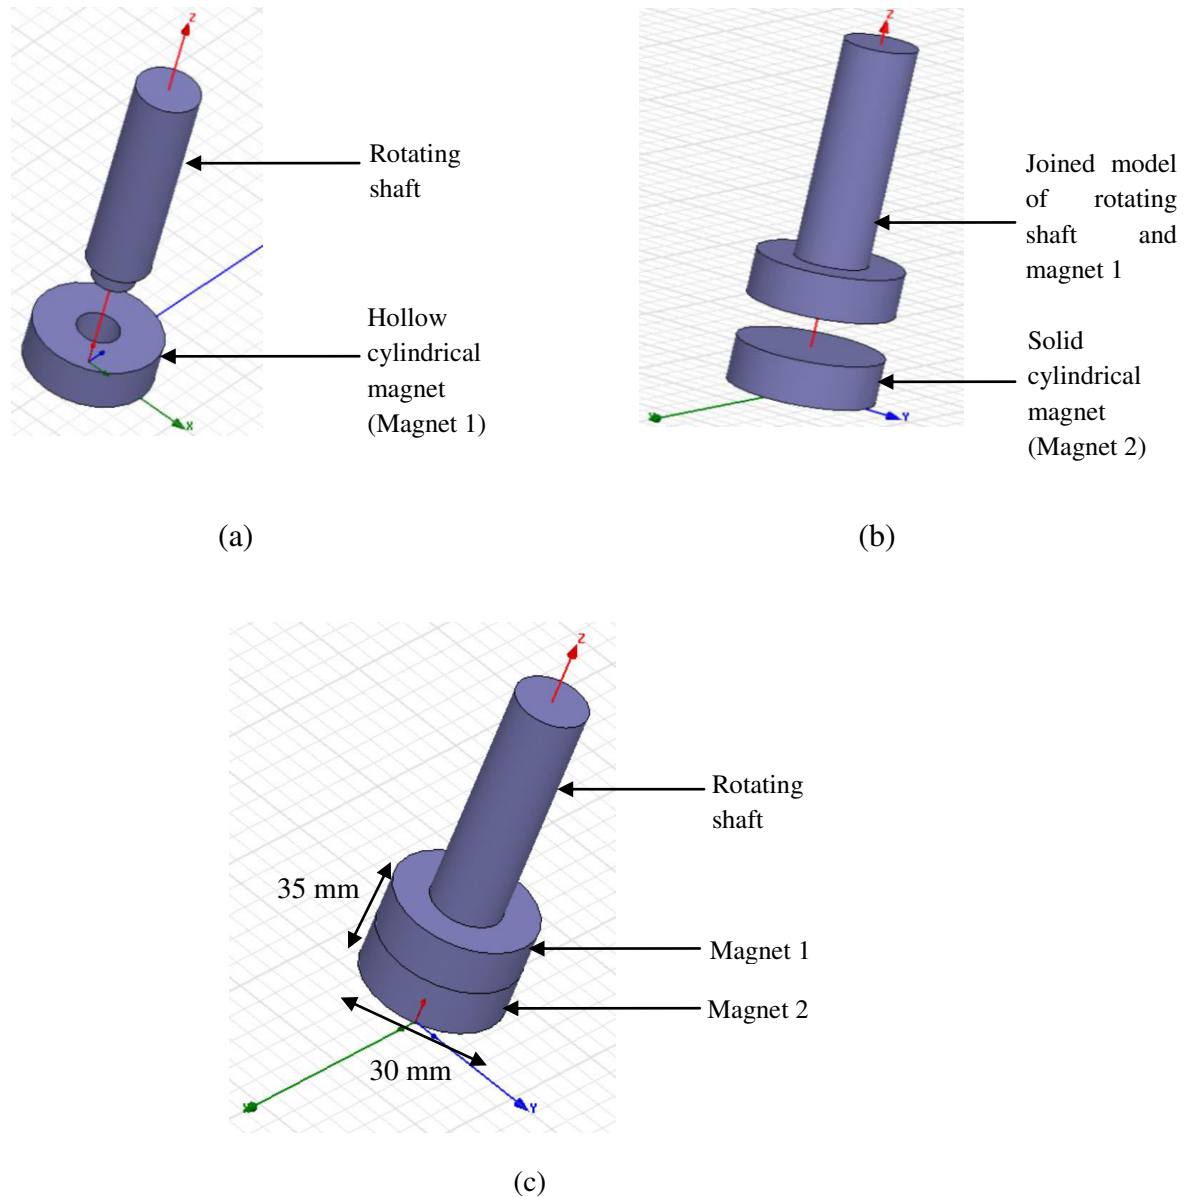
Magnetic model of (a) rotating shaft and hollow cylindrical permanent magnet, (b) solid cylindrical permanent magnet and joined model of the rotating shaft and hollow cylindrical permanent magnet and (c) final permanent magnet finishing tool.
